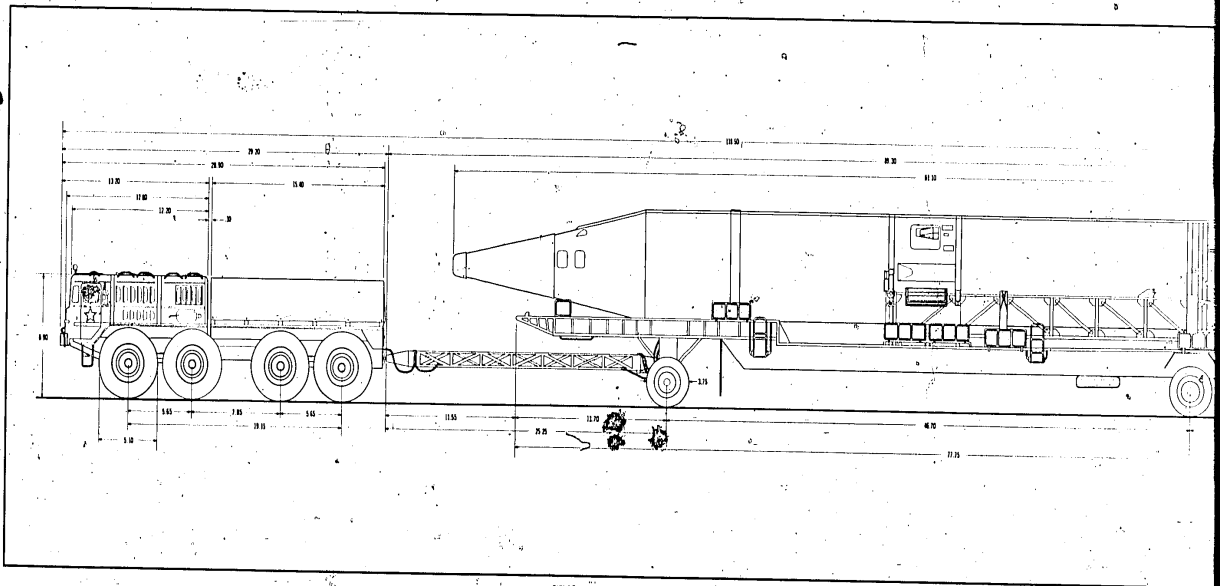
DIMENSIONAL DRAWING OF THE SKEAN MISSILE TRANSPORTER TRAILER, AND TRACTOR VEHICLE.
